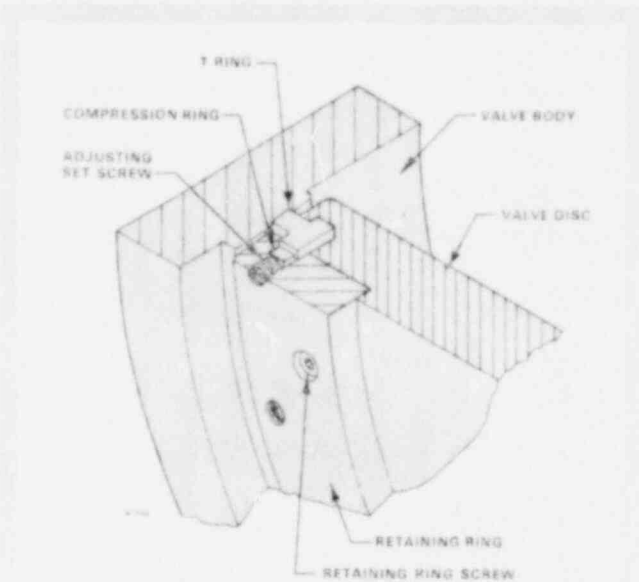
9200 Series Specification C-1 Valve T-Ring Details
